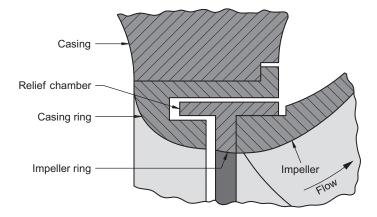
"Single labyrinth" of intermeshing type (double ring construction with nozzle type ring).
